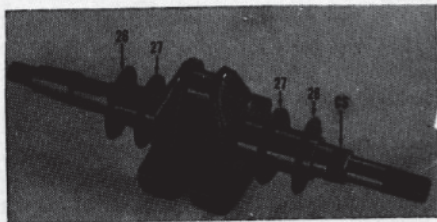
Be sure the steel thrust washers (26) are to outside of thrust bearings (27) when installing crankshaft on Model XL-12. Other models do not use thrust washers or thrust bearings.
